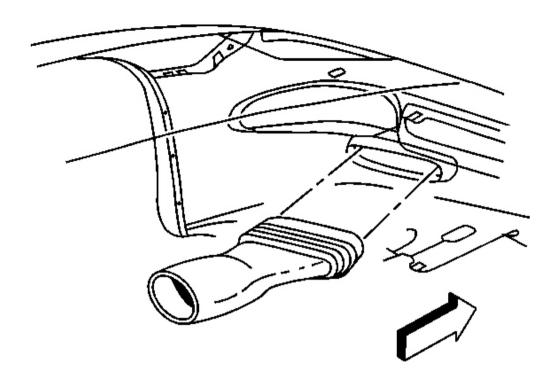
Brake Caliper Cooling Duct To Front Fascia Courtesy of GENERAL MOTORS CORP.
